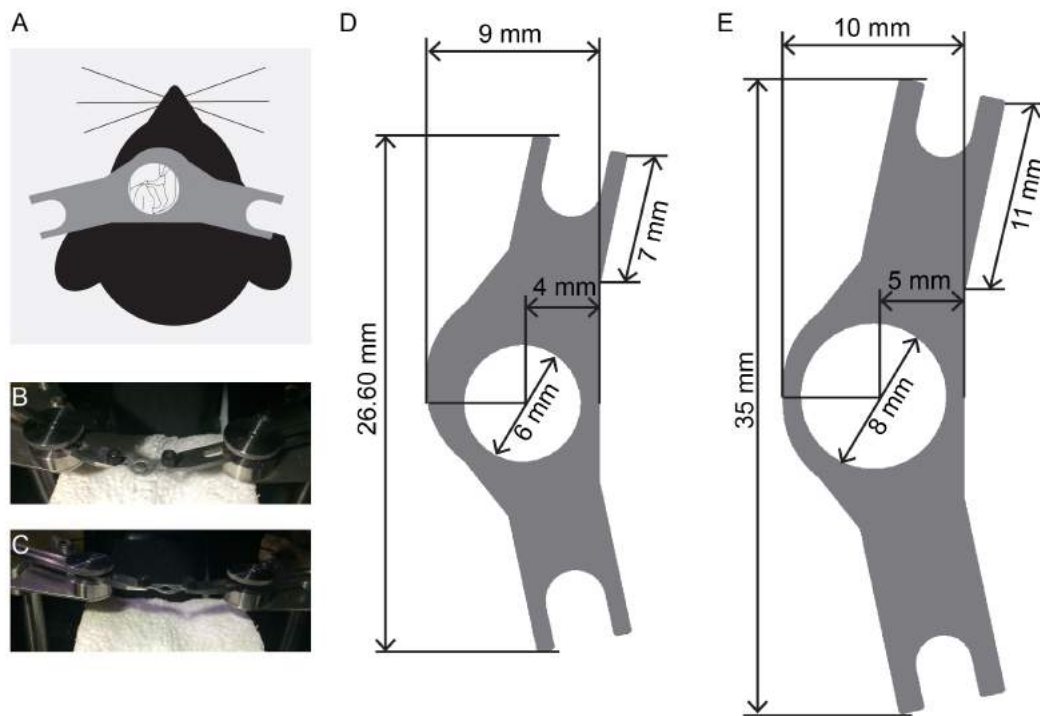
Head-plate design for stable head fixation under two-photon imaging set-up: A) Schematic showing the head-plate attached to a mouse head. B) Pictures of a head-plate fixed in head-restraint, front view. C) Pictures of a head-plate fixed in head restraint, top view. D) Model of the head-plate used for experiments using the 40x objective. E) Model of the head-plate used for experiments using the 25x objective.
